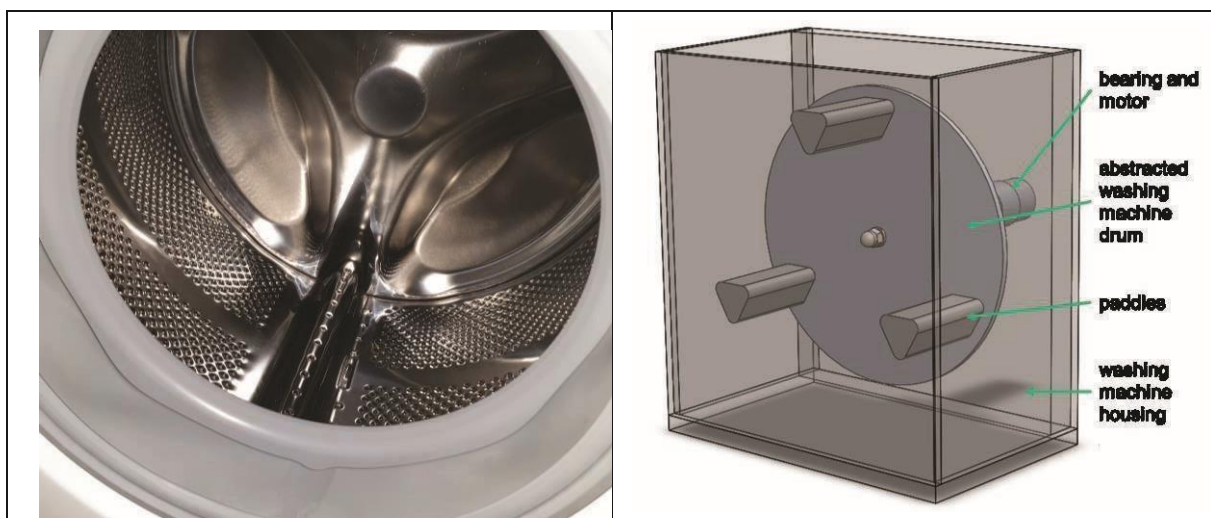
Washing machine paddle inside a washing machine drum (l.) and washing machine test bench for investigation purposes (r.)
